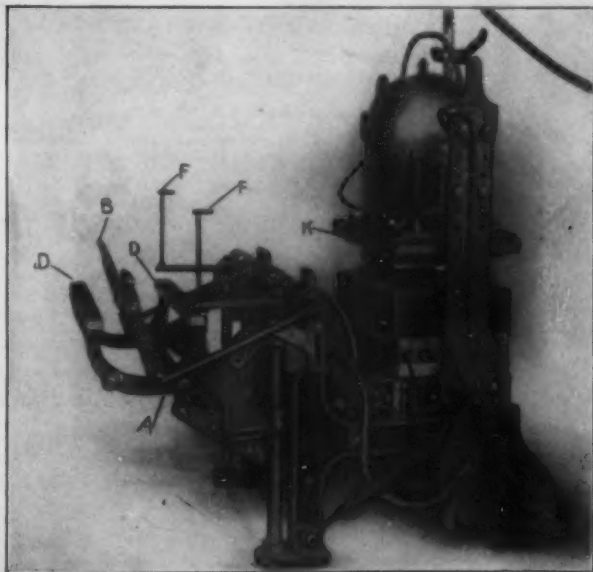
The Power-Ramming Roll-Over Core Machine Built by the Elmira Foundry Company, Elmira, N. Y.
